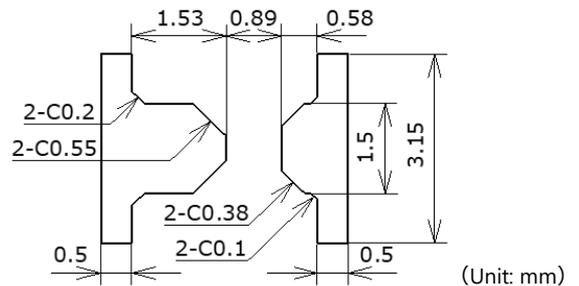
Example metal solder stencil aperture as a countermeasure against part floating
